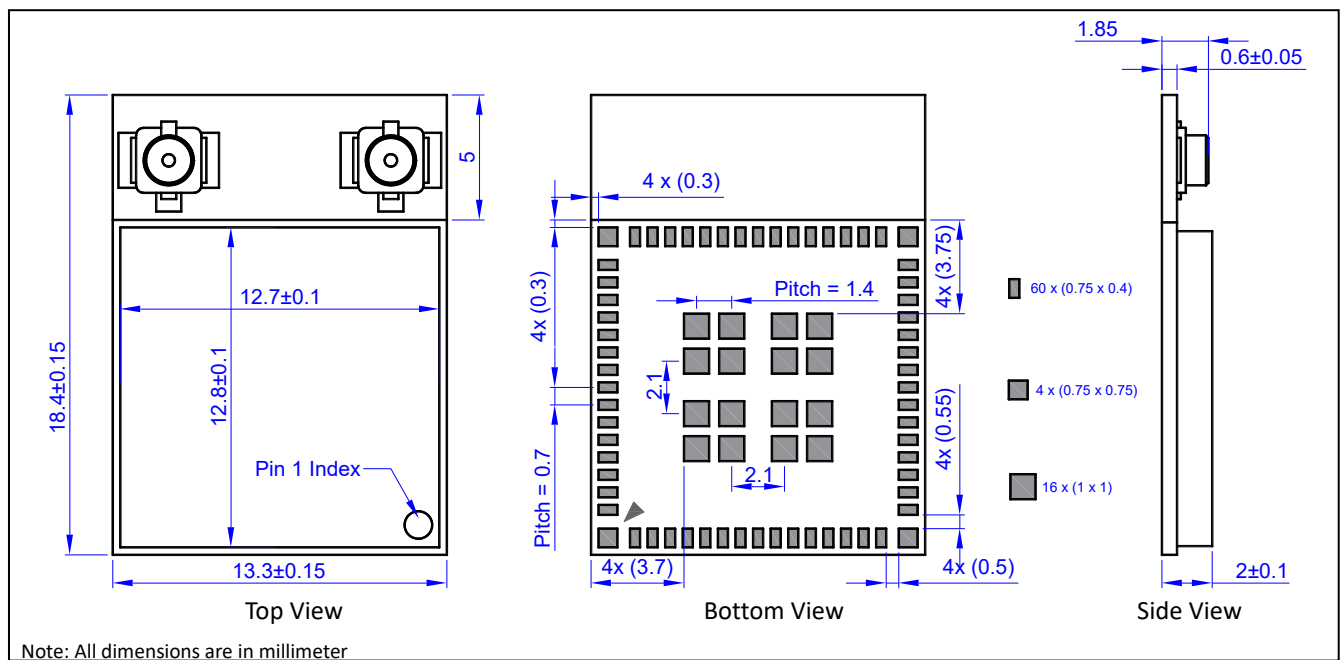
Mechanical Drawing of BDE-BW3351UP2
